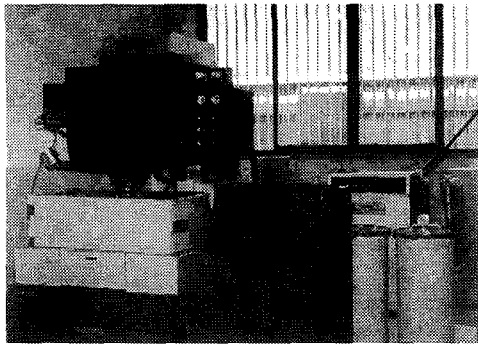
Wire electrodischarge machine for cutter manufacturing
